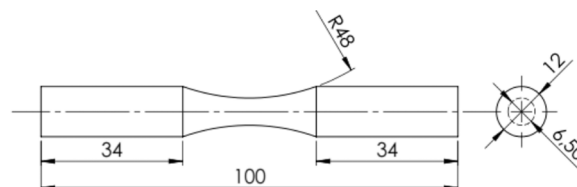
Ti-6Al-4V alloy specimen used in uniaxial fatigue tests with and without SiC film coating and Cr interlayer (Dimensions in mm).
